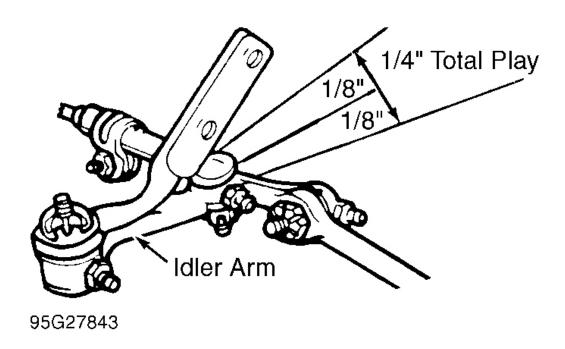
Checking Idler Arm Play Courtesy of GENERAL MOTORS CORP.
